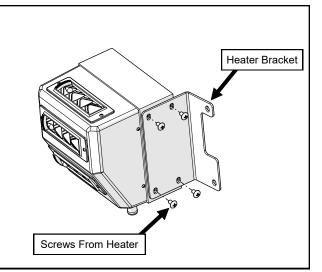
(Pre-Assemble Heater to Bracket)
